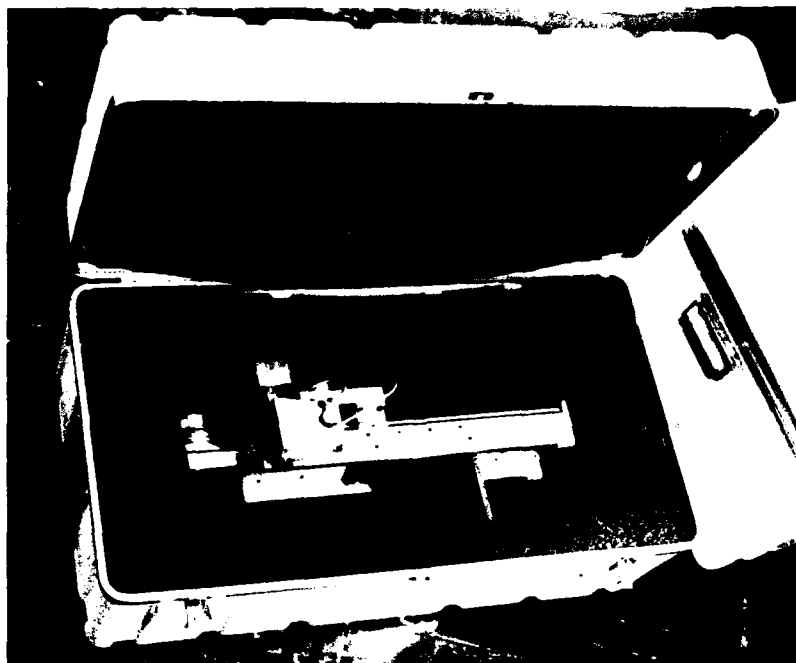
The vertical slide assembly shown partially unpacked in its shipping container.
